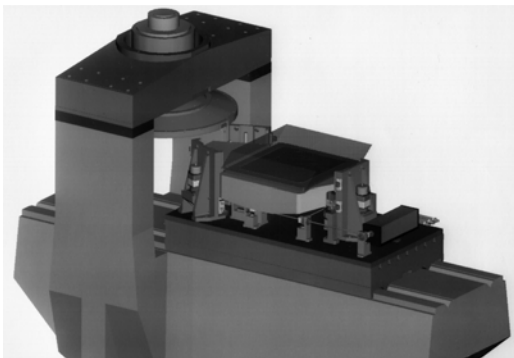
The LLNL Prototype Flatness Machine design is highly integrated to reduce complexity during machine assembly. (40-00-0299-0448pb01)
